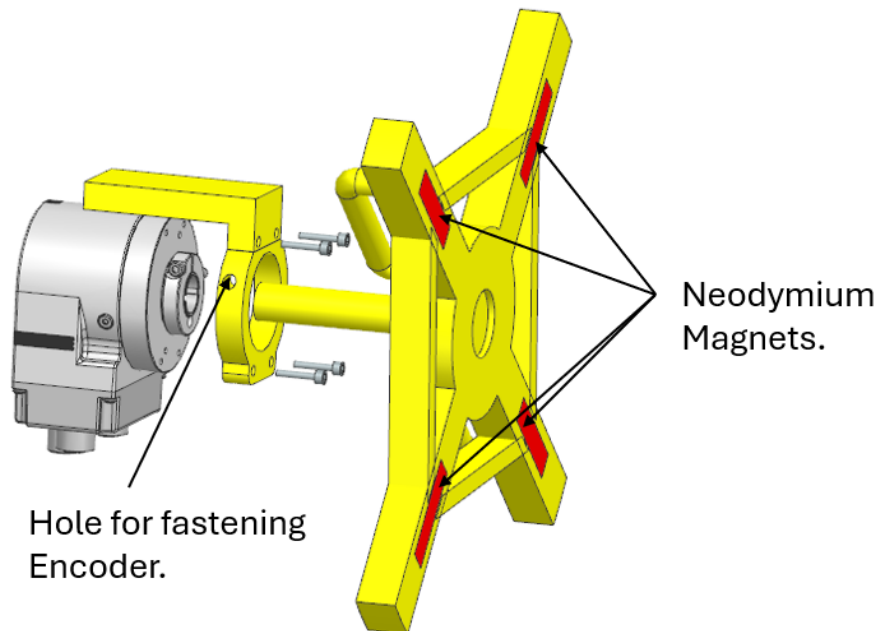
Concept of crankshaft measuring tool from NX left angle.
